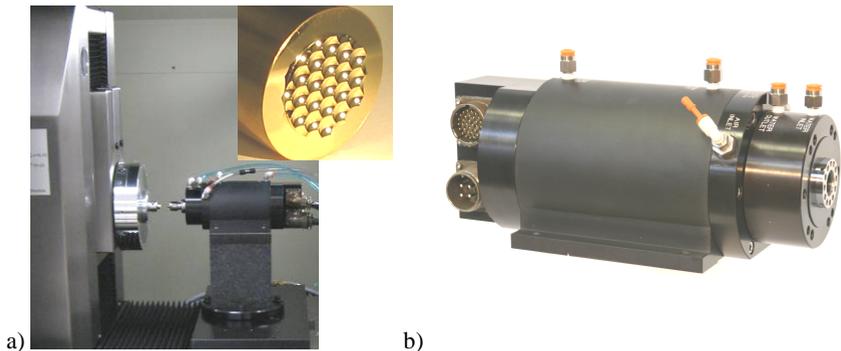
a) Micro-milling a lens array mold with the spindle discussed in this paper (photo courtesy of Moore Nanotechnology Systems), this mold was machined using the spindle discussed here and b) ISO 50K air bearing micro-milling spindle.
